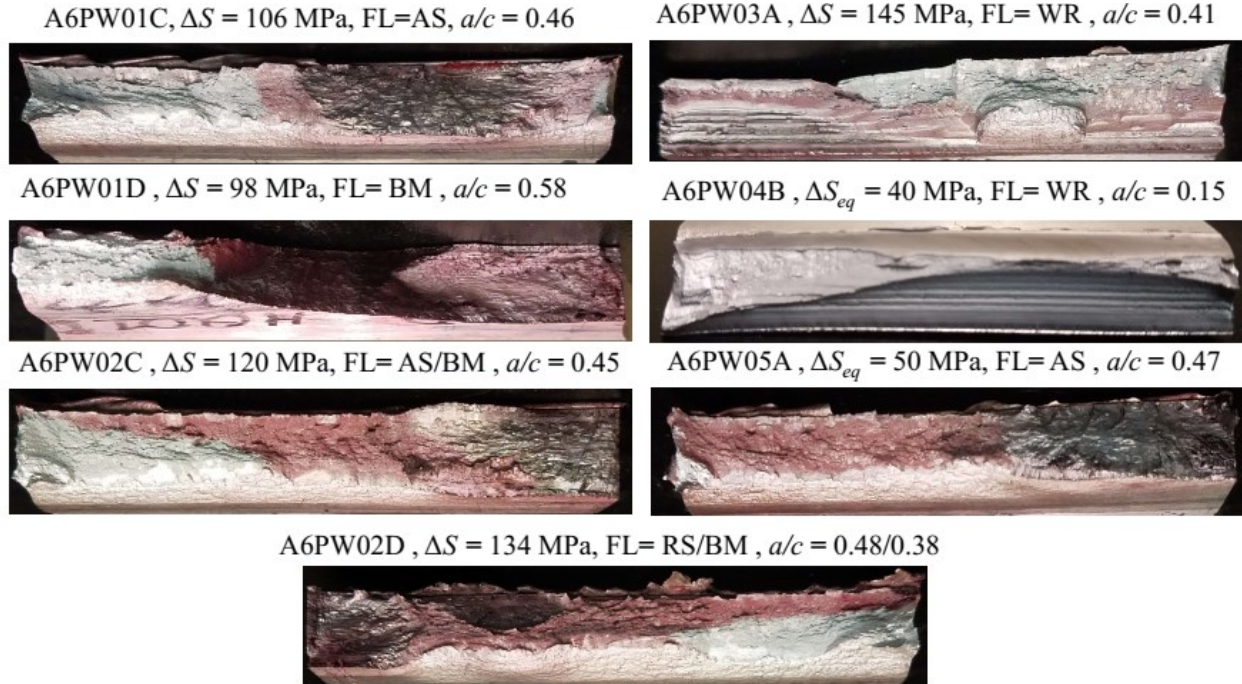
Fracture surfaces of properly welded specimens
